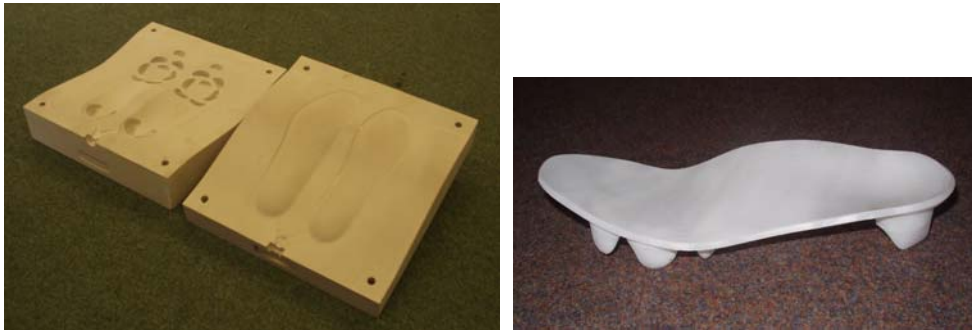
(left) CNC machined injection mold core and cavity, and (right) a cleated outsole fabricated using RP technology.
